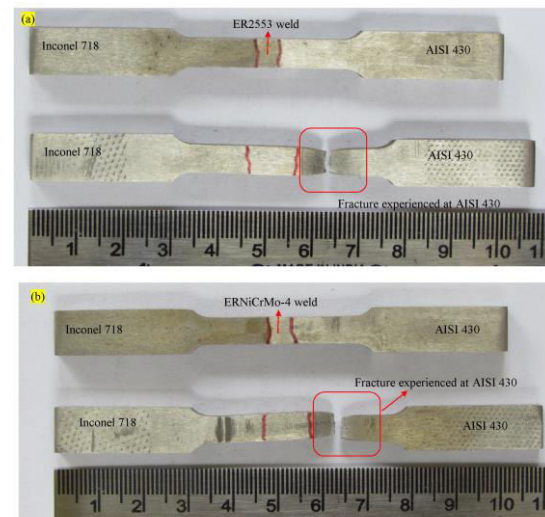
Tensile tested samples of PCGTA weldment of Inconel 718 and AISI 430 employing (a) ER2553 and (b) ERNiCrMo-4 filler.
